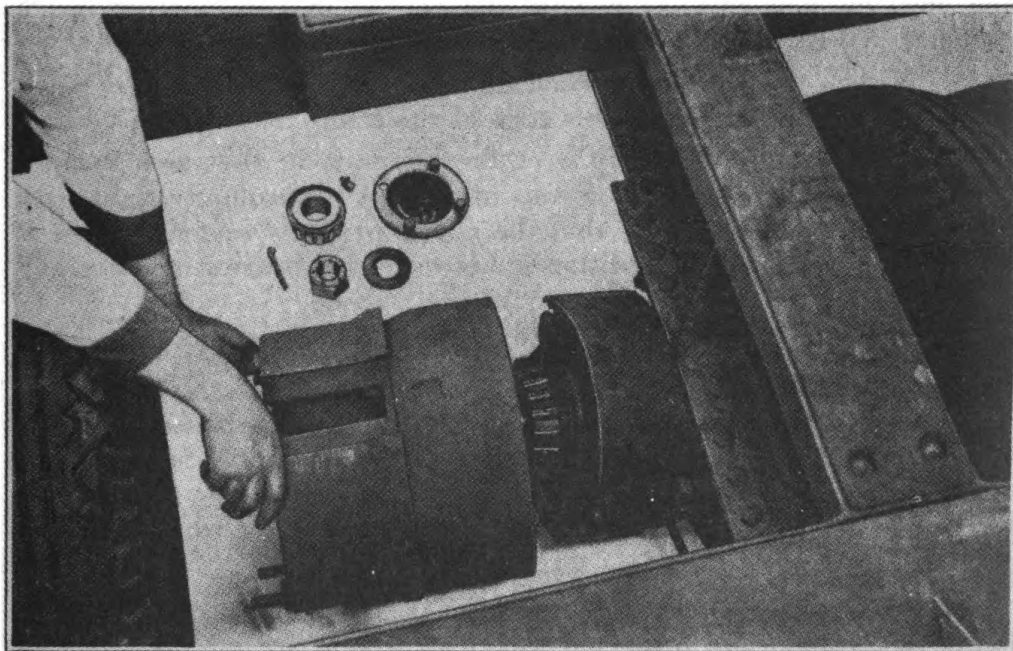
REMOVING INNER WHEEL ASSEMBLY—REAR
